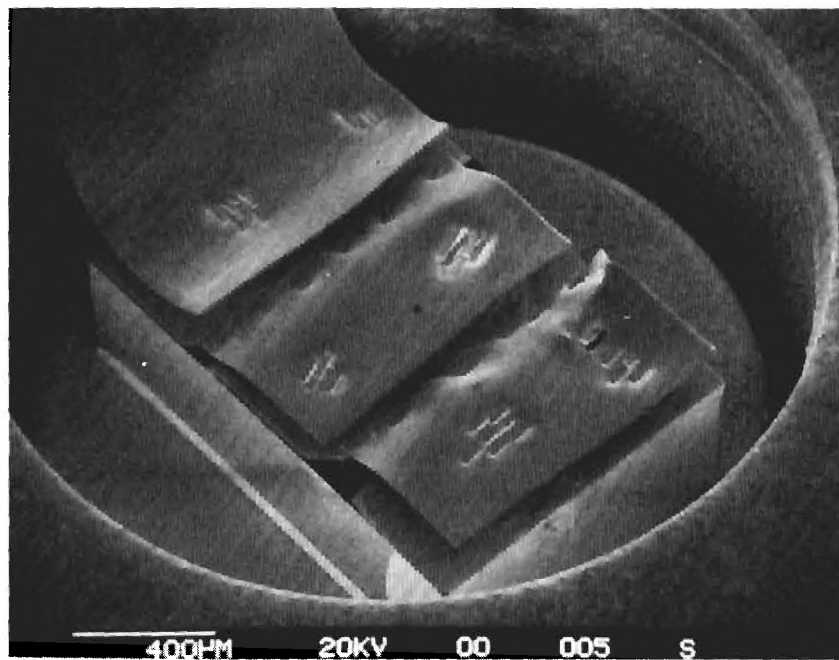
Three-Chip Assembly VSX9251AM-0. Nominal Geometry of Three-Chip Device. Mag. = 48X.
